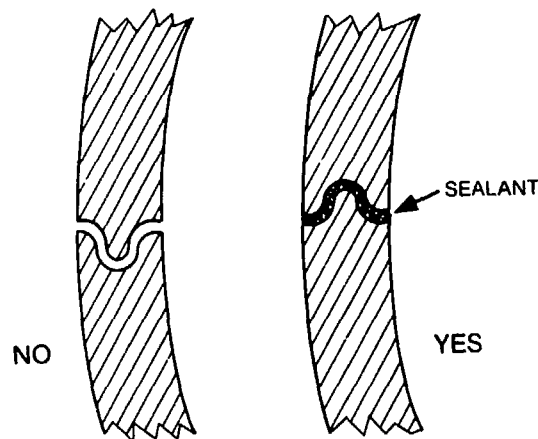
TONGUE-AND-GROOVE CONSTRUCTION OF ALUMINUM SKIN
